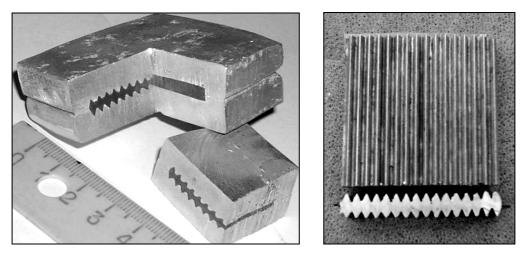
Proposal for the cold welding of the aluminium bands: the joint aspect and the intermediary element
